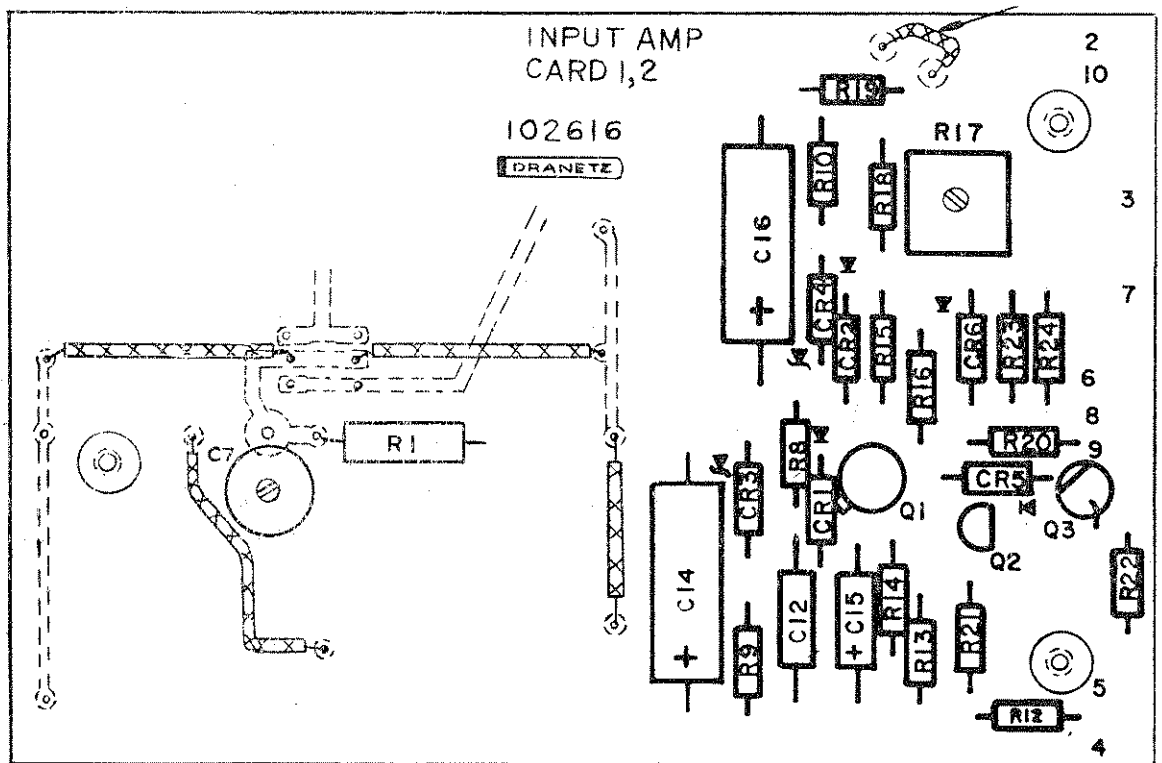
Plug-In Model 305-PA-3002 Cards A1 and A2 Input Amplifier, Parts Location (Drawing No. 102841A)
